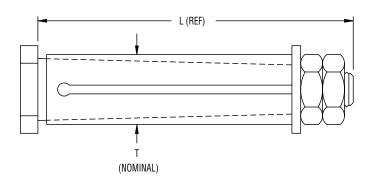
LOADS (LBS) • DIMENSIONS (IN)
